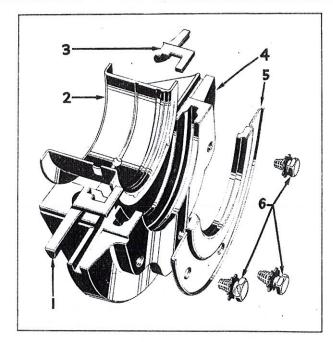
Crankshaft Rear Bearing Cap Oil Seals
